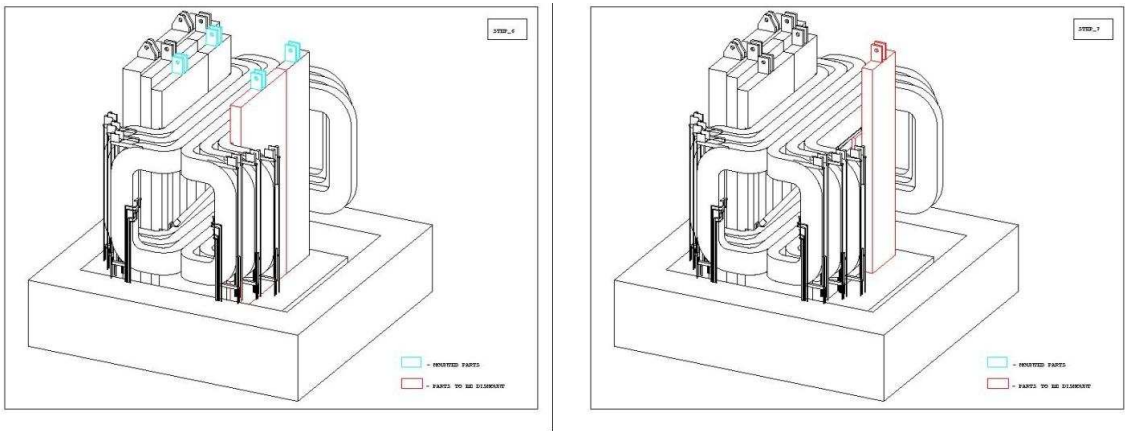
SM3 Analysis Magnet Assembly Steps 7 (left) and 8 (right)
